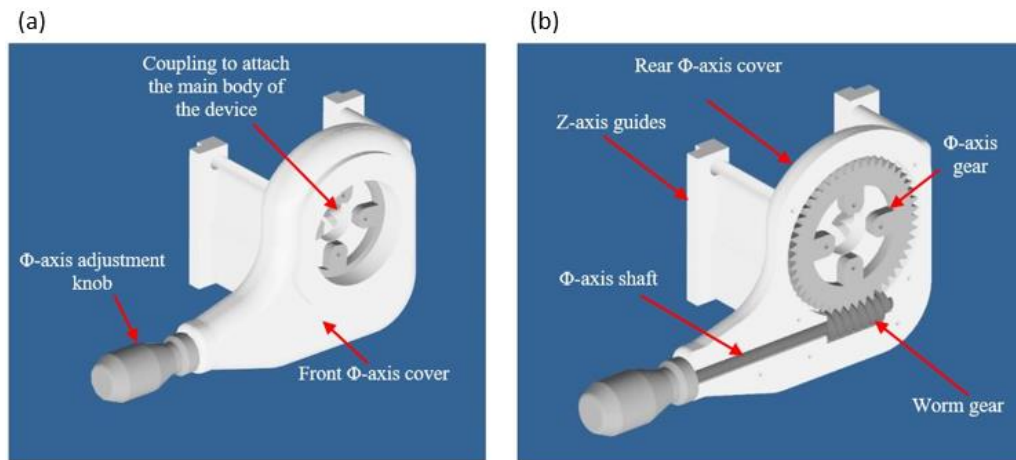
a) CAD drawing of the angular axis (Φ -axis), and b) mechanism of the axis (worm drive).
